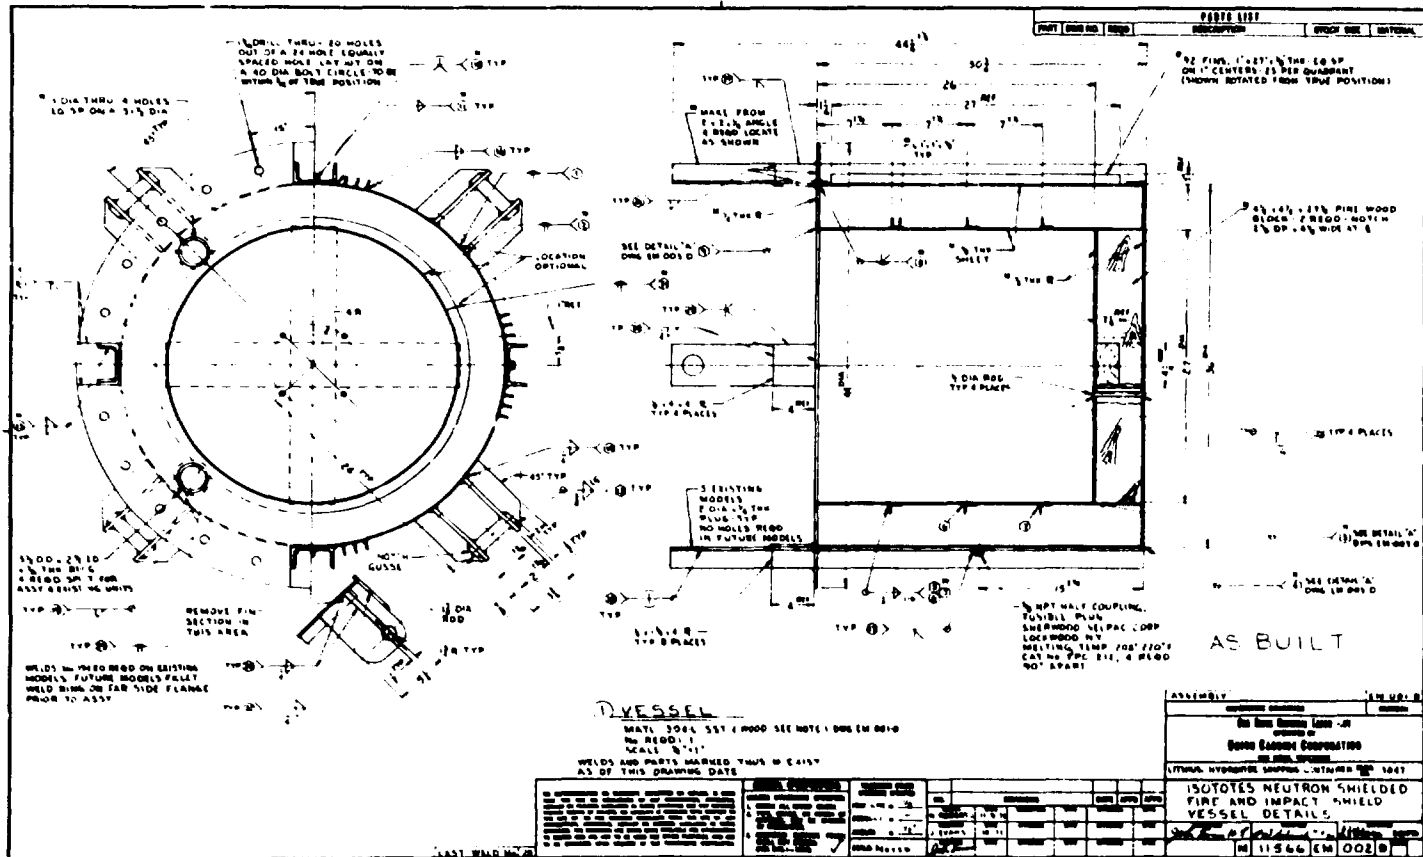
As-built drawing no. M-11566-EM-002-D.
